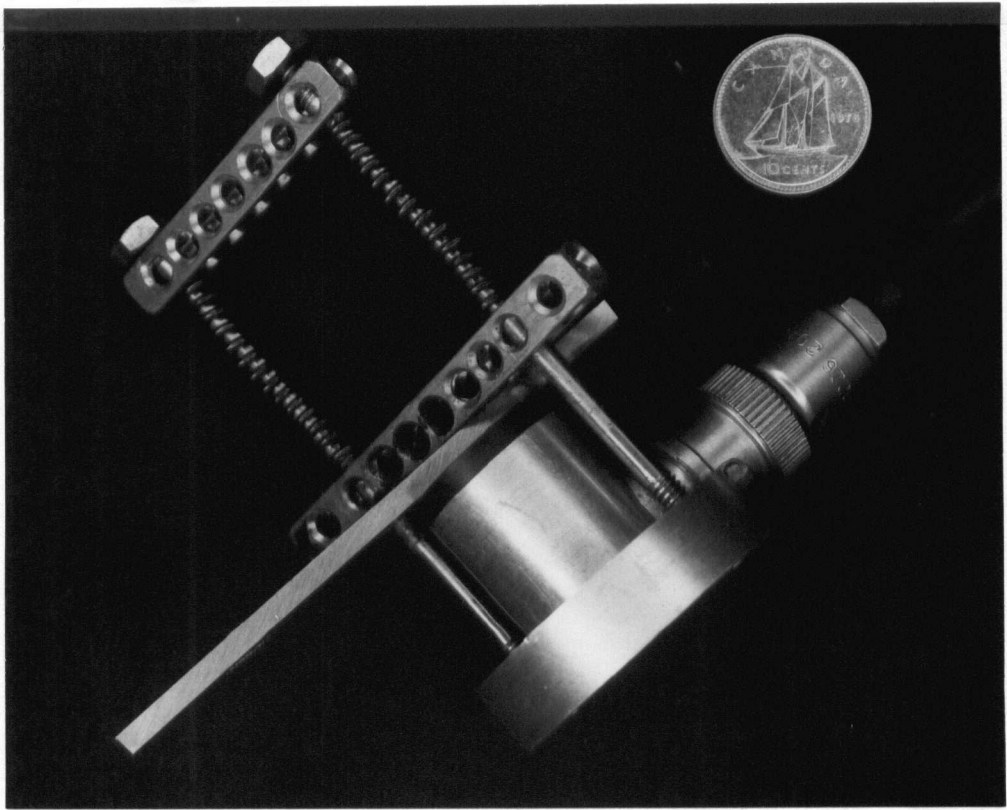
Fixture used for attaching transducer to martensitic steel composite specimens.
